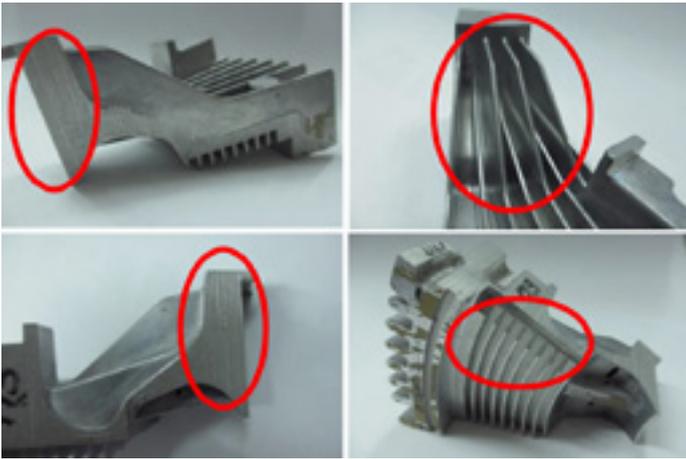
New design showing reduction or elimination of pinhole and air porosities for a defect-free casting
